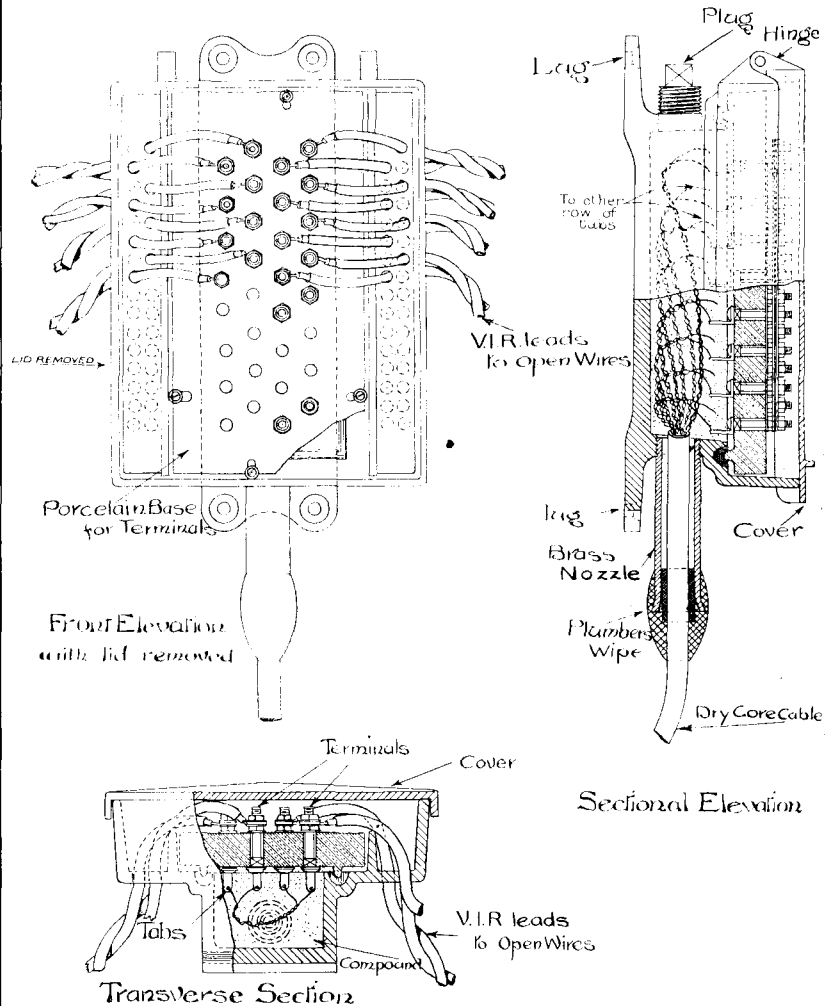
CABLE TERMINAL—WESTERN ELECTRIC TYPE 14 (Drawing).
